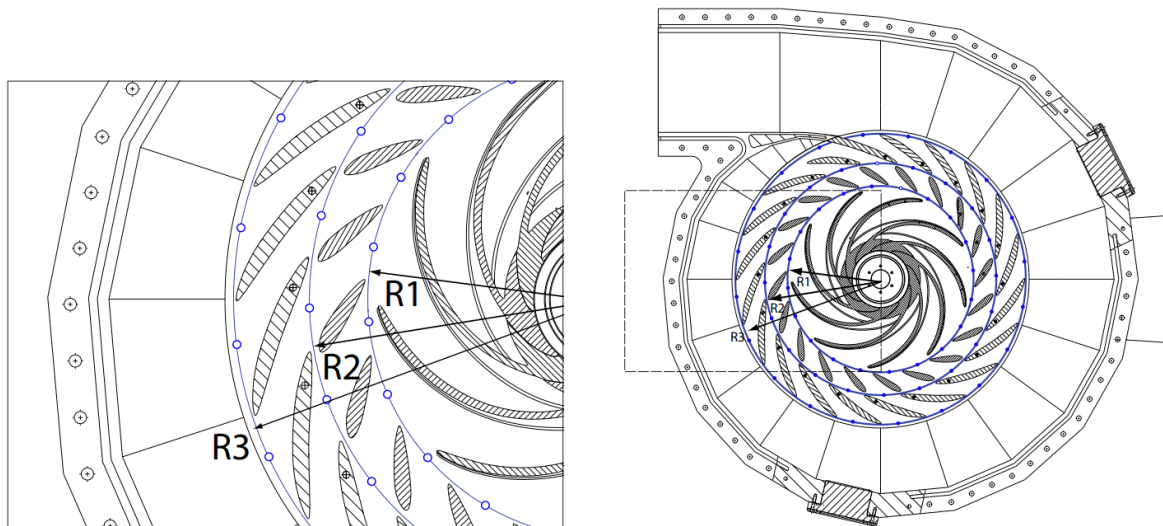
Volute, stay and guide vanes and runner blades of a Francis turbine. Reproduced from [12].
